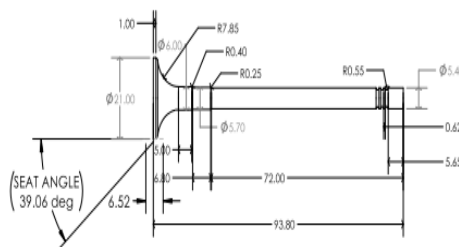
Dimensions and detailing of exhaust valve drawing prepared on Video Measuring Machine
